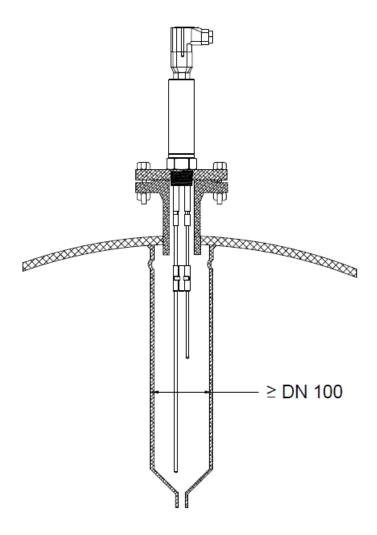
Installation of SD 1200 Level Probe to Protection Tube
